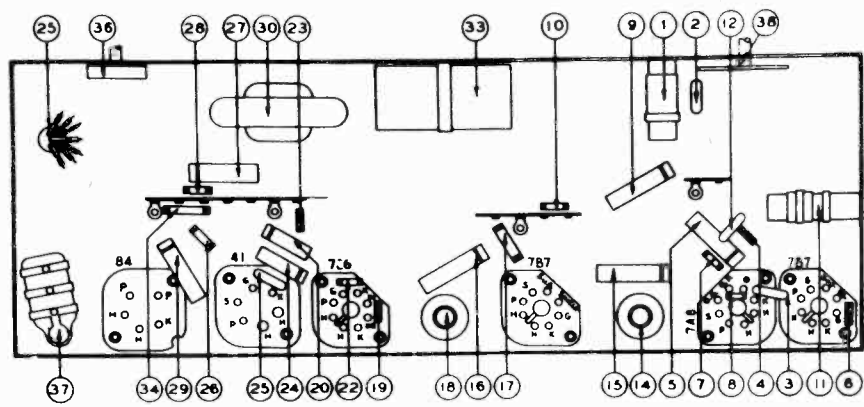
PART LOCATIONS. UNDERSIDE OF CHASSIS.
